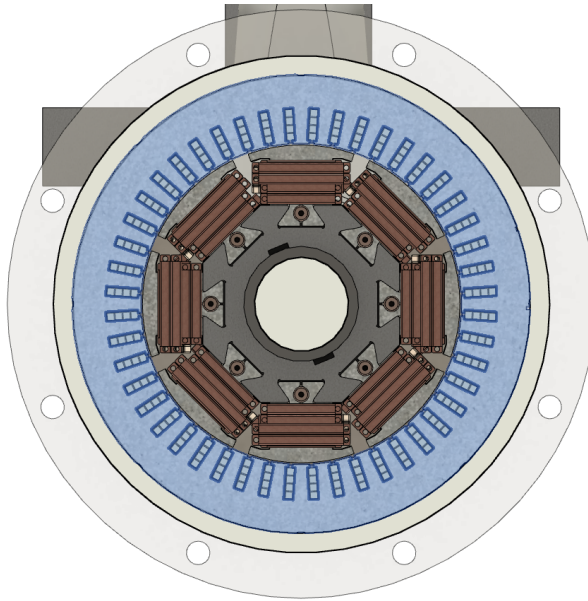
Transverse cross section of the 3D CAD model of the prototype, highlighting the stator in blue.
